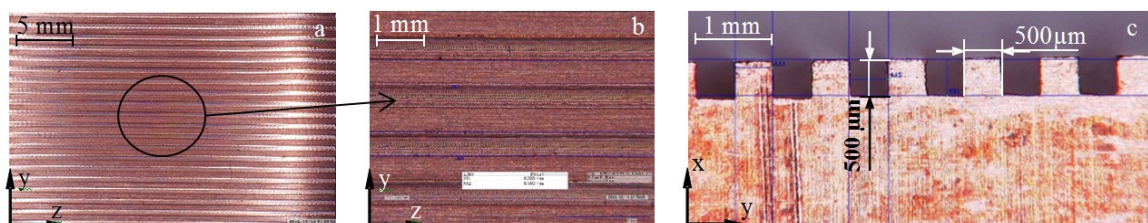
Longitudinal square-grooved surface: a) top view b) 4X view c) cross-sectional view
